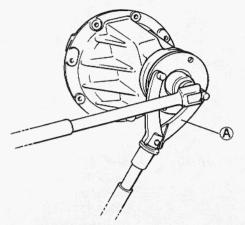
(A) Special tool (Rotor holder 09930-40113)
